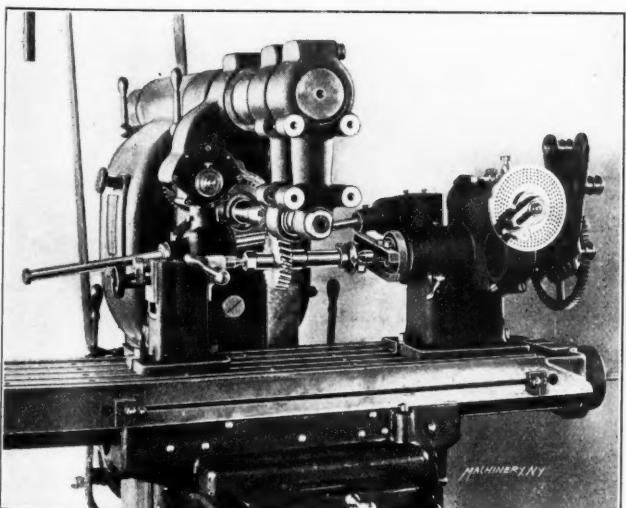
Cutting a Small Worm-wheel with the Change Gearing Directly Connected to the Work Spindle.
